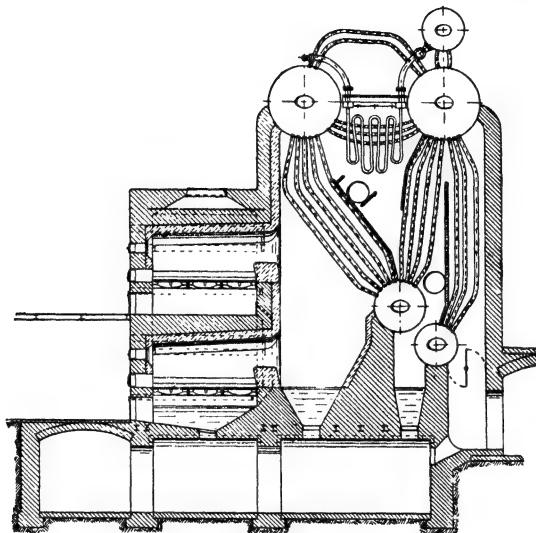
Two-storied Frontal Furnace for a Water-tube Boiler
